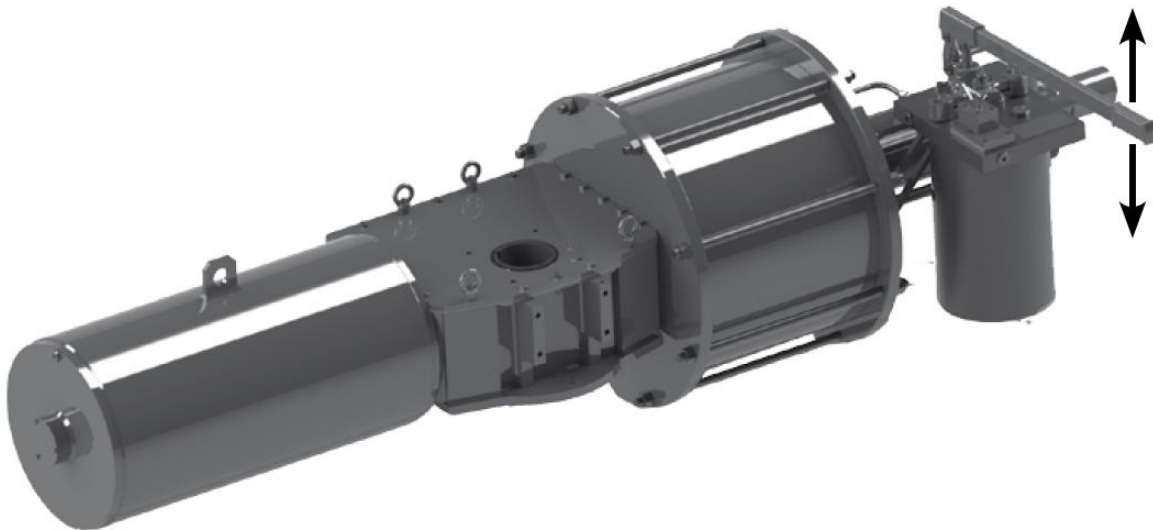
Hydraulic Hand Pump Manual Override Installed on Single-Acting Actuator
